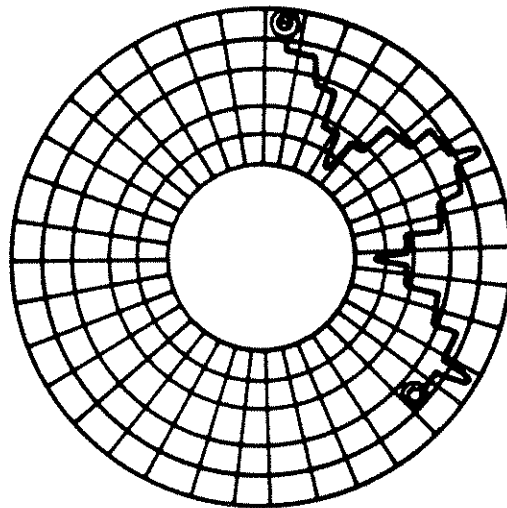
Circular three-dimensional braiding machine layout (Chou 1989)
